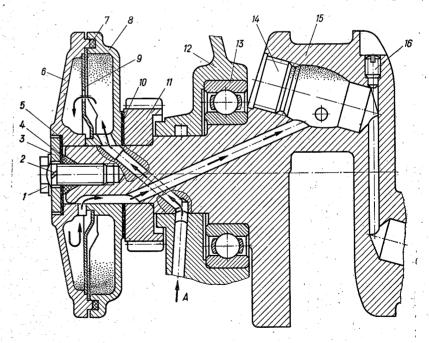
Centrifuge and front main ball bearing: 1—centrifuge fastening bolt; 2—lock washer; 3—centrifuge washer; 4—sealing ring; 5—gasket; 6—centrifuge cover; 7—sealing ring; 8—centrifuge body; 9—screen; 10—timing gear gasket; 11—driving timing gear; 12—front bearing body; 13—front main ball bearing; 14—plug; 15—crankshaft; 16—screw; 4—from oil pump
